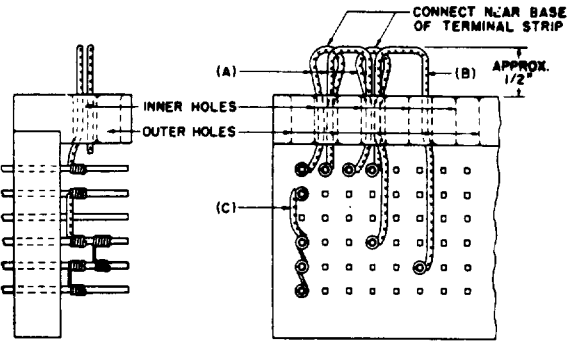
Cross Connections — 251-, 252-, and Similar-type Terminal Strips — On Same Terminal Strip
